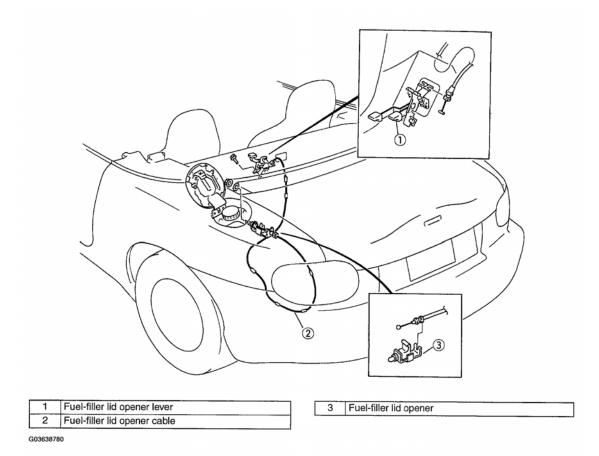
Removing Fuel-Filler Lid Opener Courtesy of MAZDA MOTORS CORP.
